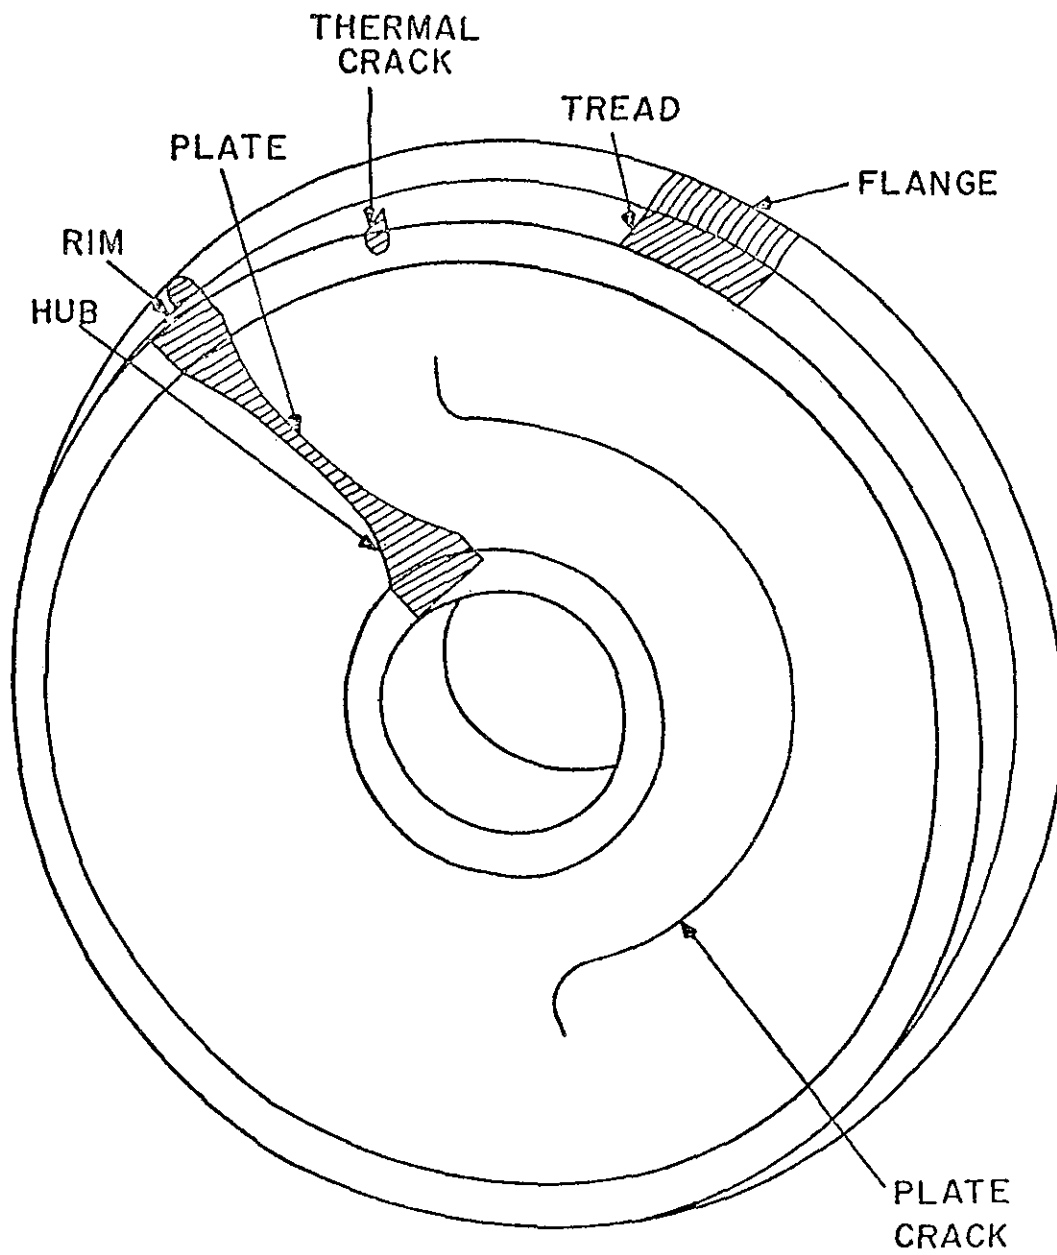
WHEEL SHOWING TYPICAL CRACKS
